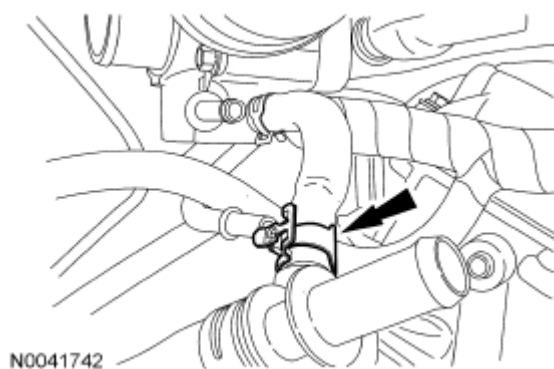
Locating Throttle Body Coolant Hose Clamp
